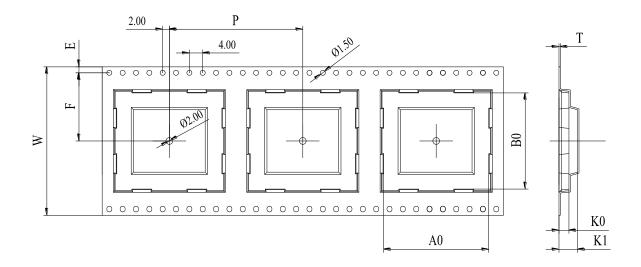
Carrier Tape Dimension Drawing (Unit: mm)
